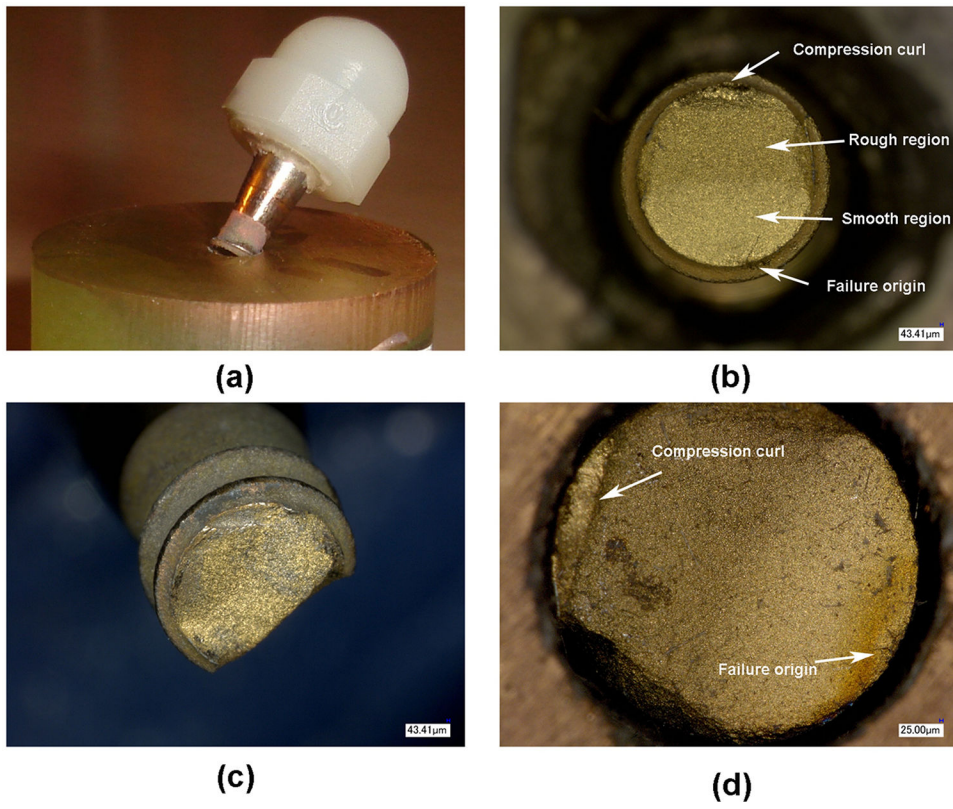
Optical photos of fractured specimen (a) and fracture surface (b-d).
